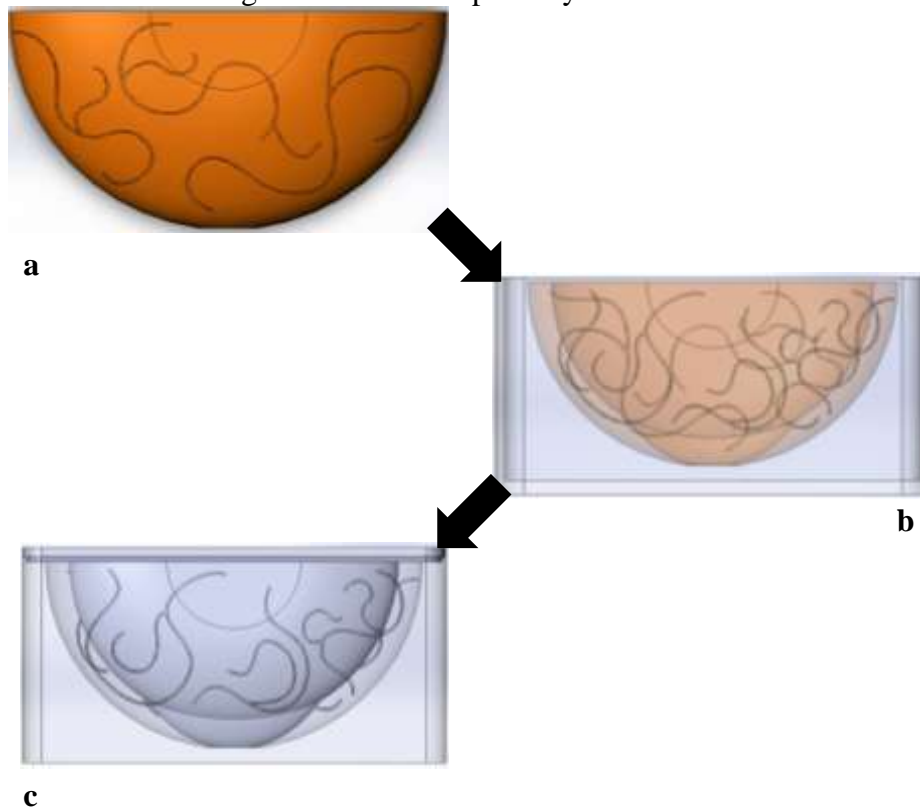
Manufacturing of the mould setup: *a* – an adipose layer manufactured by 3D printing (or conventional machining); *b* – bottom silicone master; *c* – complete moulding setup (adipose layer shape is removed)
